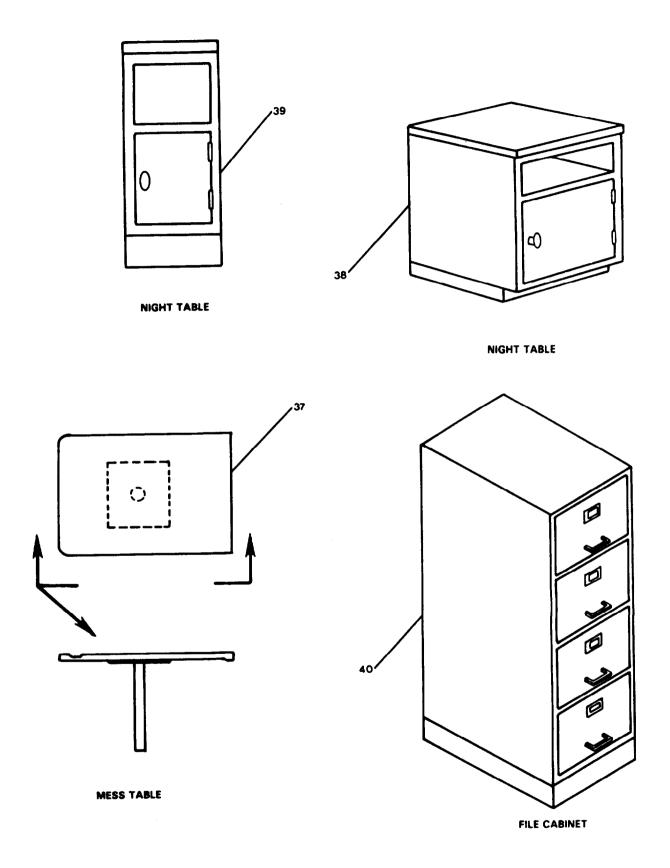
Furniture and Fixtures (Sheet 11 of 14).
